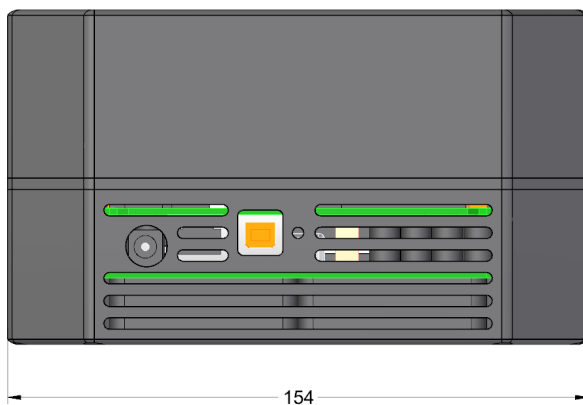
G3 camera with enhanced cooling and internal filter wheel bottom view
